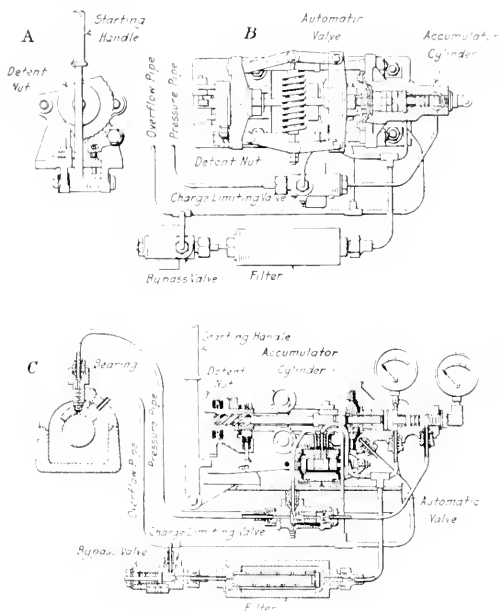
MICHELL'S AUTOMATIC LUBRICATING GEAR
